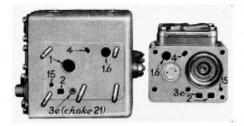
Bolting Faces, Emergency Face of Pipe Bracket and Emergency Portion
